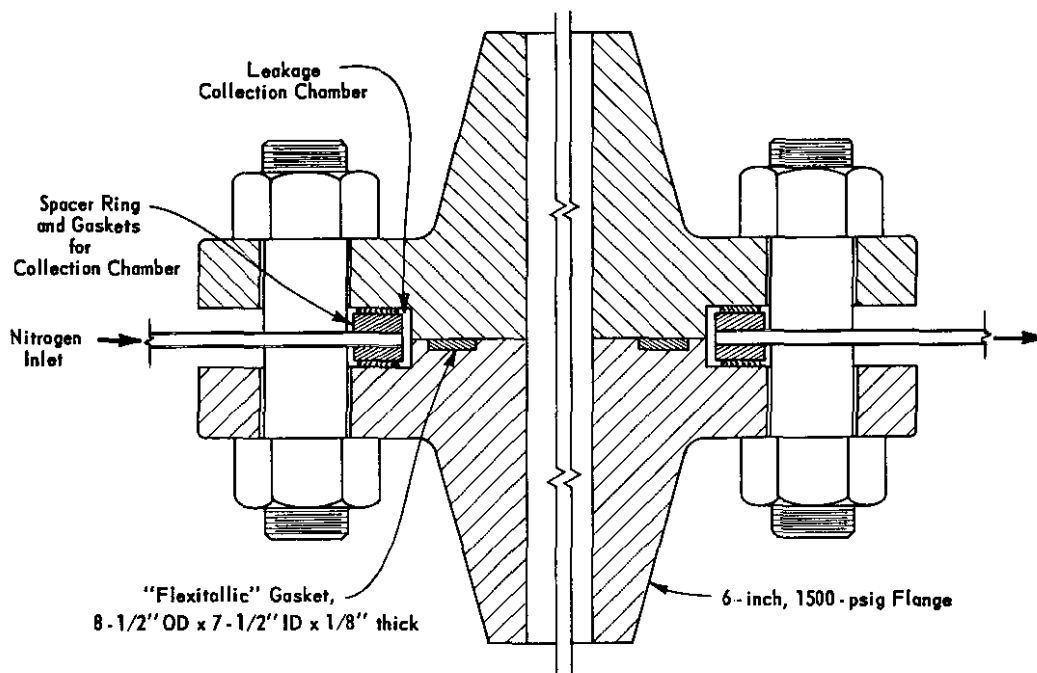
TEST ASSEMBLY OF GASKET FOR CONTROL ROD CLUSTER HOUSING
